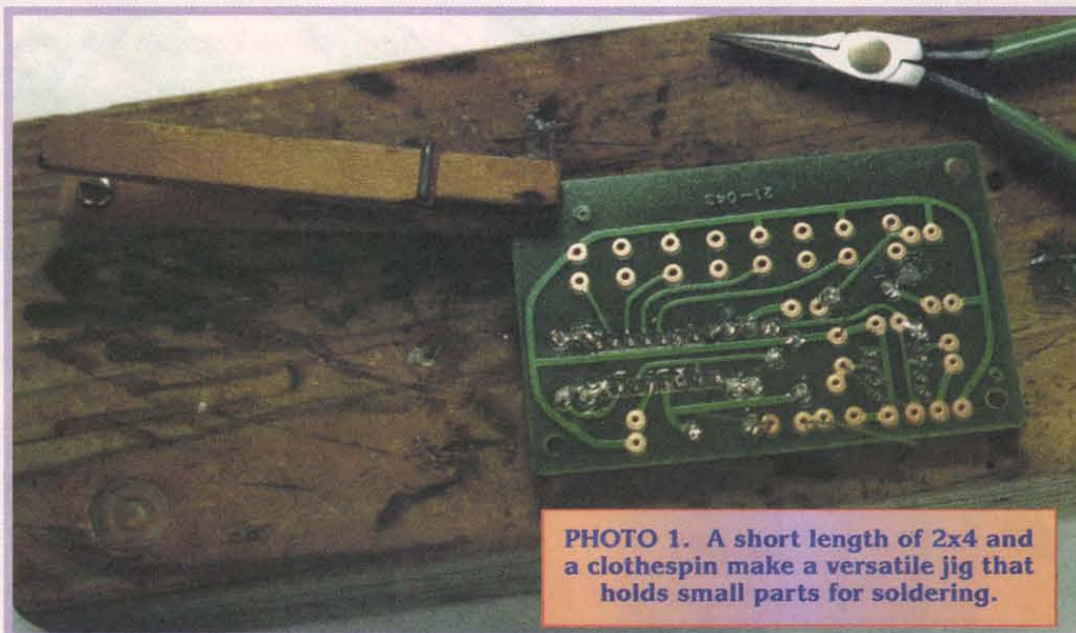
A short length of 2x4 and a clothespin make a versatile jig that holds small parts for soldering.
